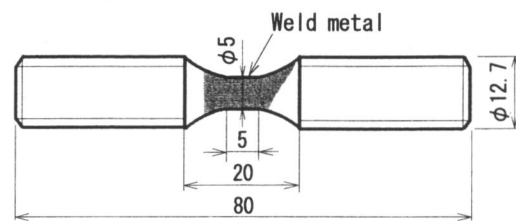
Round-bar tensile specimen for weld metal.
